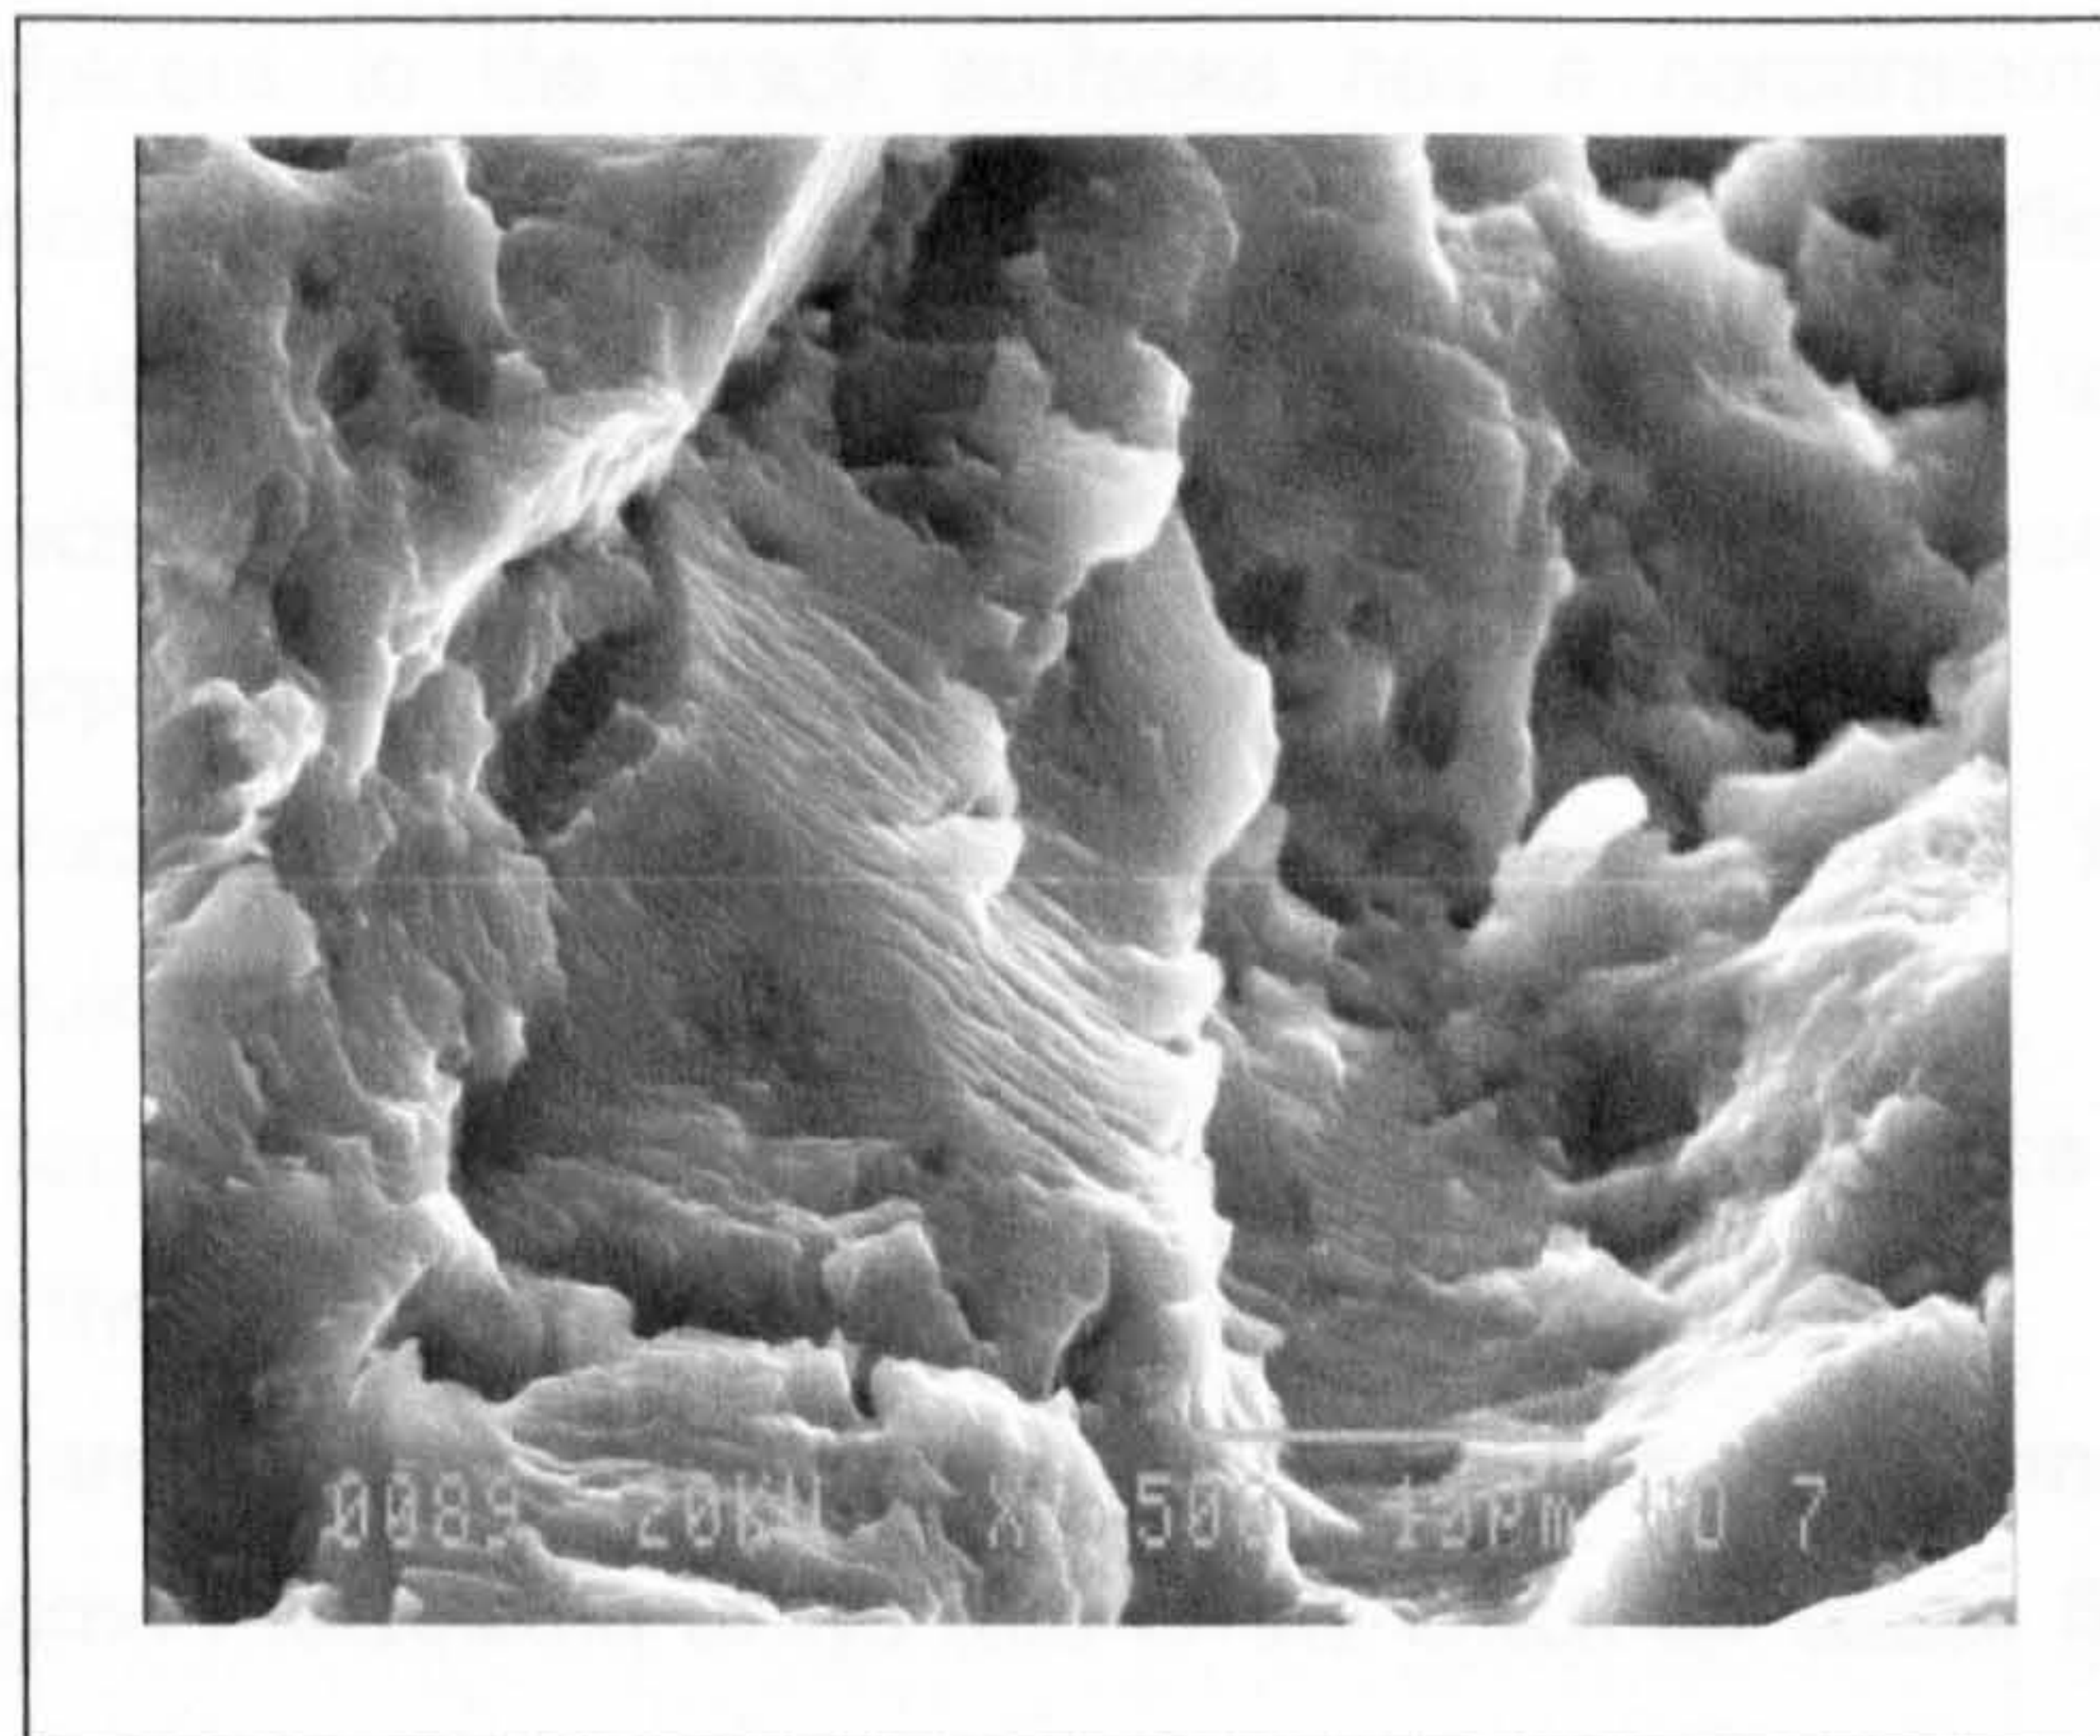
Fatigue crack growth surface striations in a friction stir weld.
